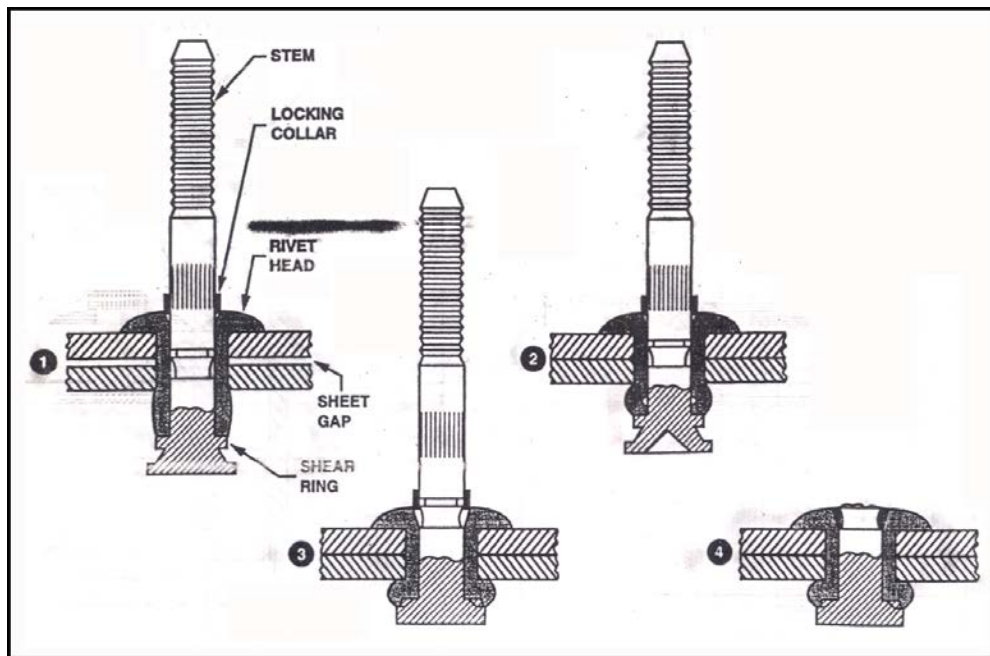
, As the stem is pulled into the rivet sleeve, a bulb forms on the rivet's blind side that begins to clamp the two pieces of metal together and fill the hole. (2) - once the pieces are clamped tightly together, the bulb continues to form until the
